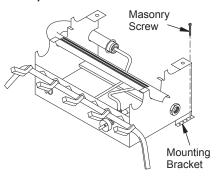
Attaching Base Assembly to Fireplace Floor - Single Burner Model
